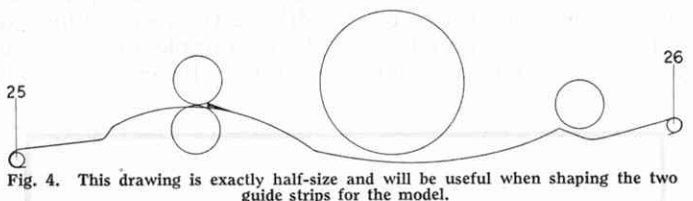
This drawing is exactly half-size and will be useful when shaping the two guide strips for the model.
